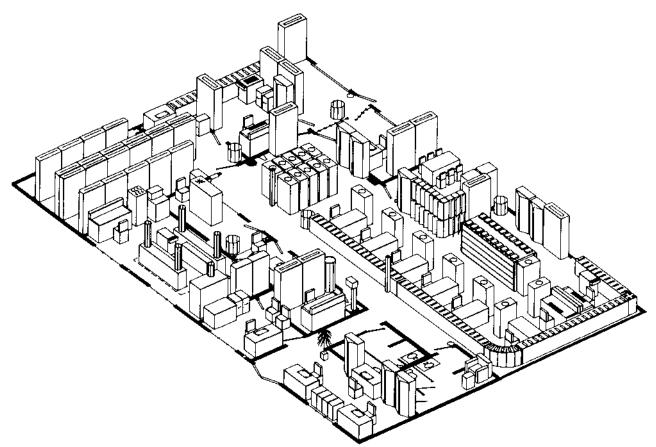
A three-dimensional computer-generated detailed layout of the same area shown in Fig. 12.1.8. (Source: Cederleaf, "Plant Layout & Flow Improvement," McGraw-Hill.)
